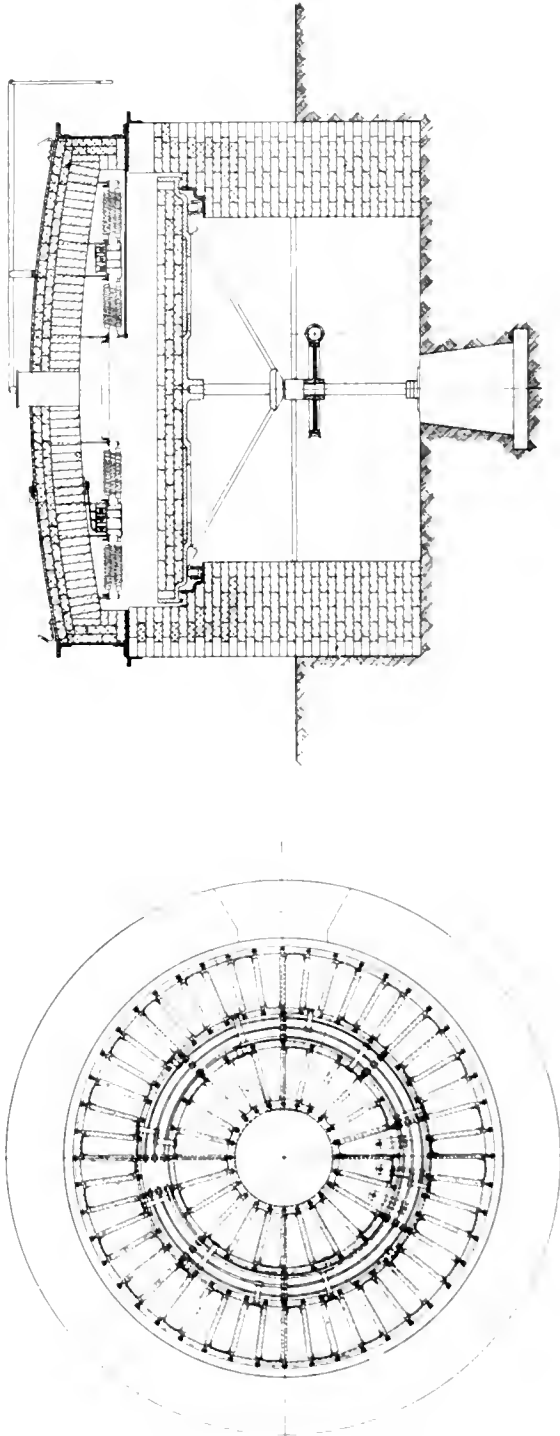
Large Furnace with Flat Hearth for Tempering Automobile Leaf Springs
